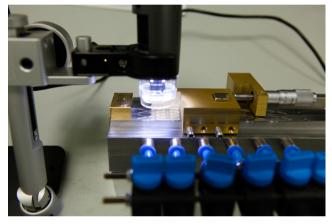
Assembly tool for the inner tracking ladders. Brass sliding block in the middle is guiding a prototype chip into position. Brass stop edge to the left. Micrometer screw to the right. Microscope to monitor position at the top.
